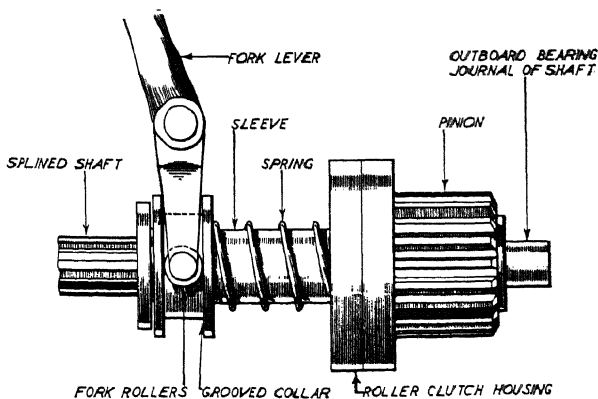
DELCO-REMY CLUTCH DRIVE (OUTBOARD PATTERN)
